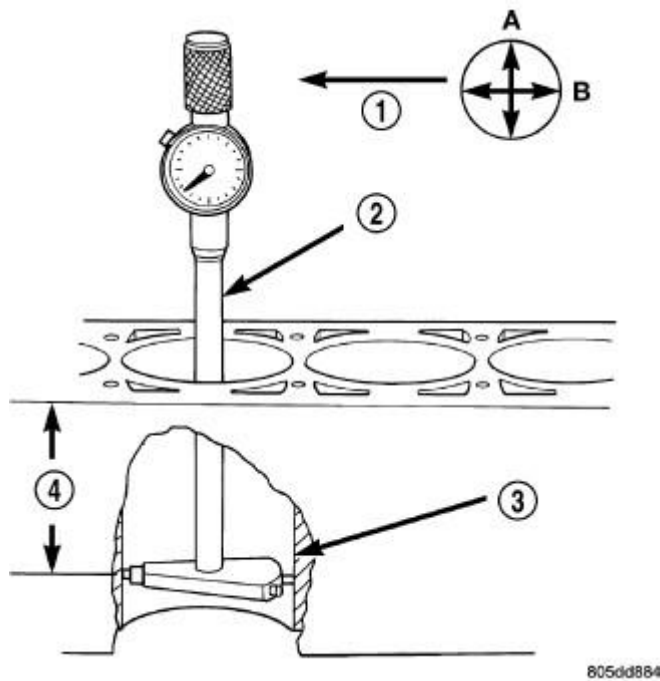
Measuring Cylinder Bore Diameter Using Dial Bore Gauge
